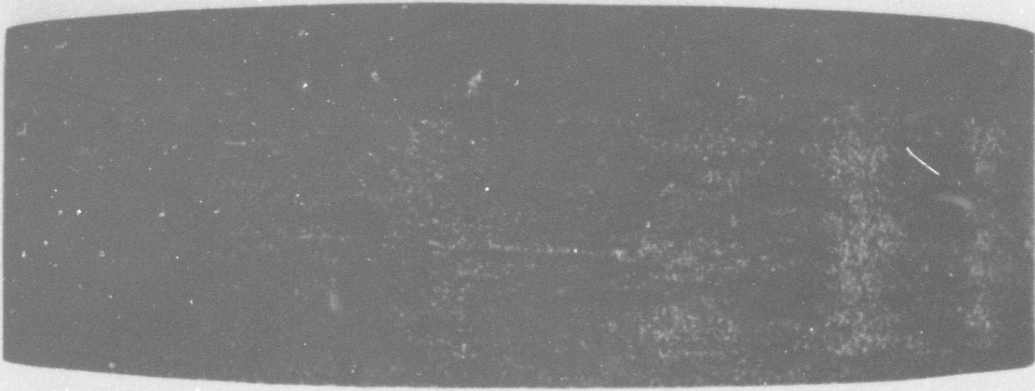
CHATTER MARKS ON GRINDING WHEEL AND WORKPIECE
